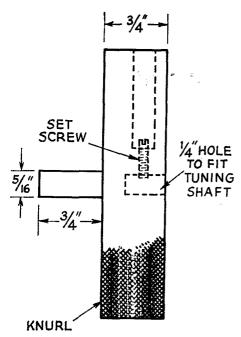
Sketch showing the details of the 3-inch brass knob that replaces the original tuning knob.
